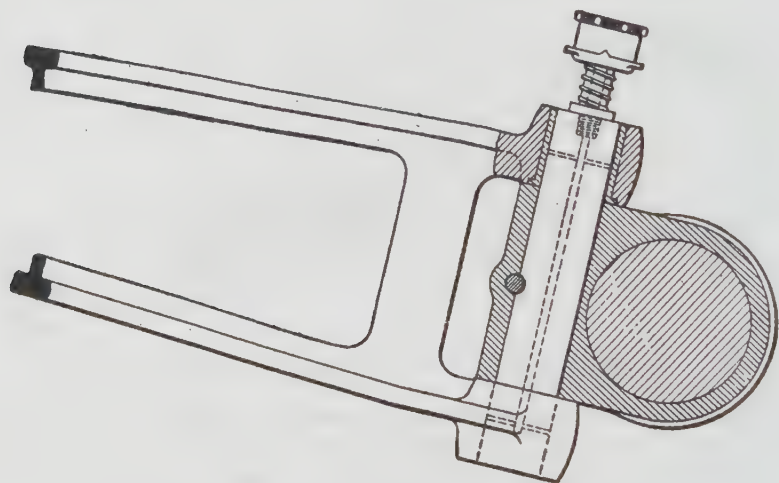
RADIUS ROD DOUBLE PIVOTAL REAR JOINT.
